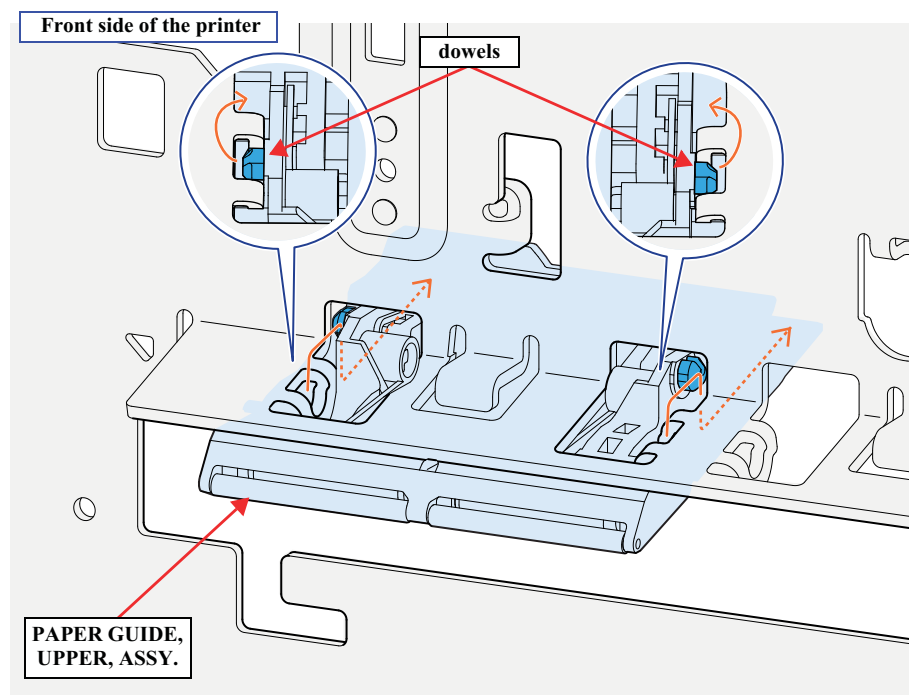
Removing the PAPER GUIDE, UPPER, ASSY.
